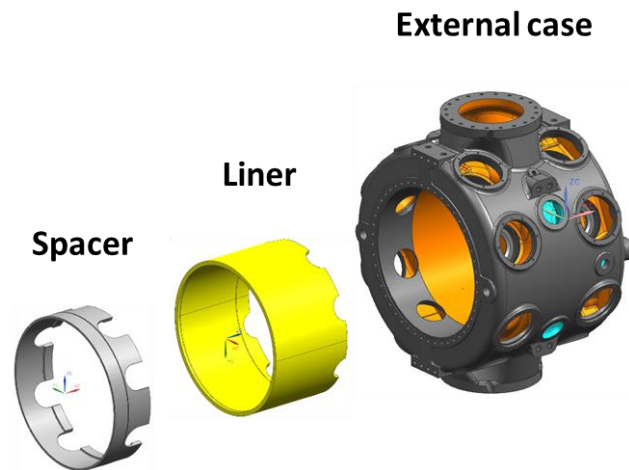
Geometric CAD of external case, liner and spacer for a typical large bore reciprocating compressor
